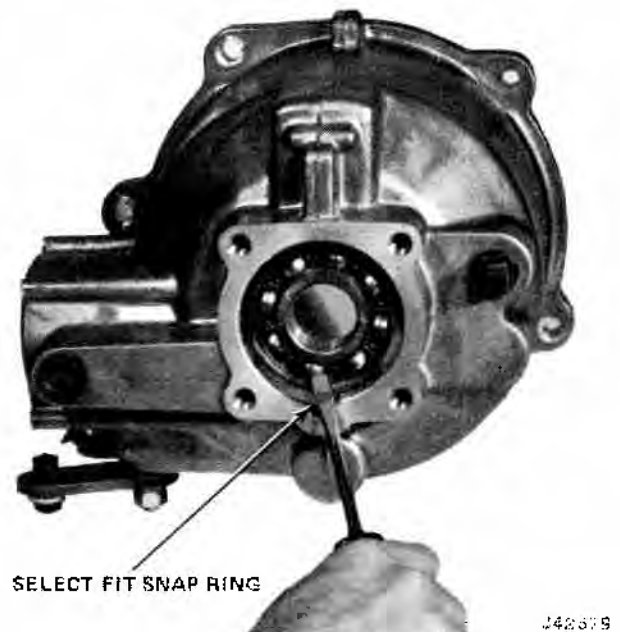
Removing Rear Annular Bearing Snap Ring
